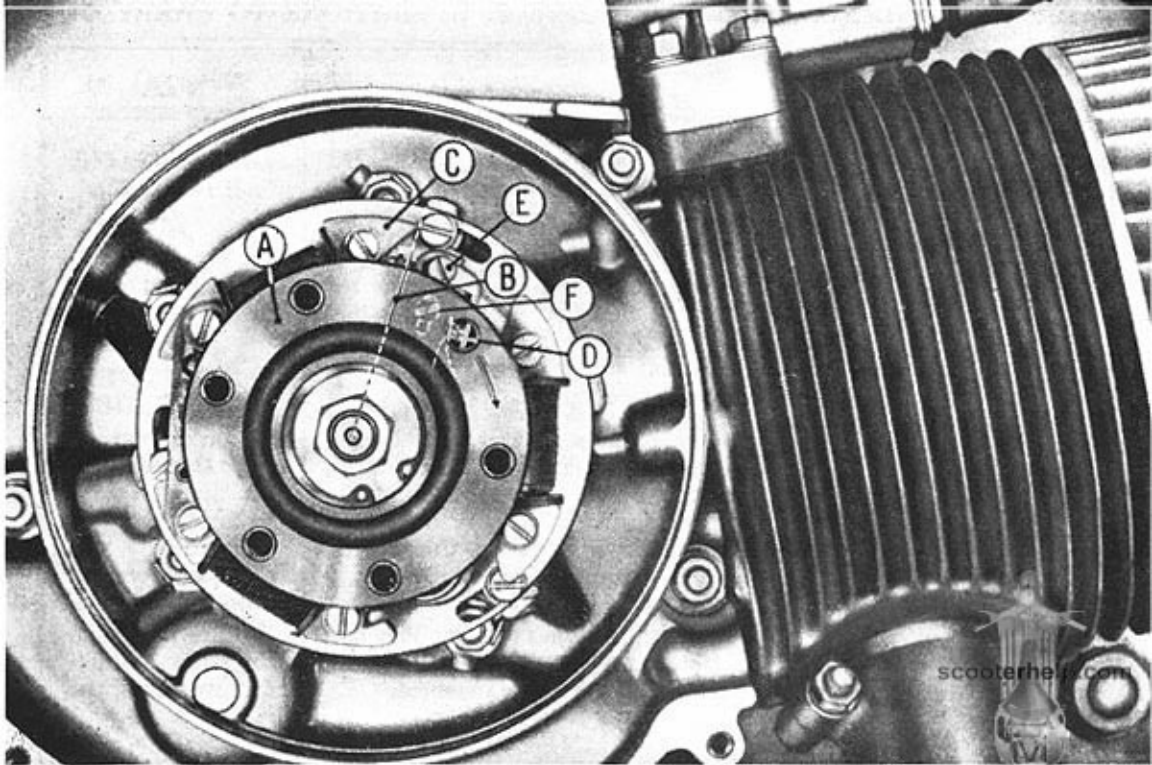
Operations for checking the “magnetic” timing of the flywheel.
